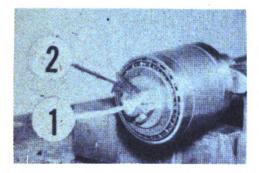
REMOVING LOCK NUT . Remove cotter pin. (1) and inner lock nut (2).
